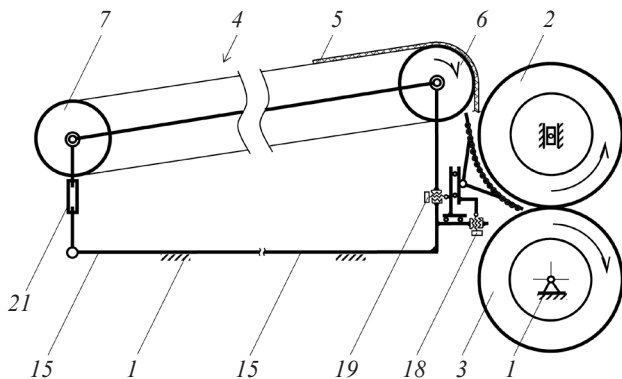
Scheme of a conveyor with a leather guiding device into the processing area between the rotating rollers: 1 – bed; 2 – upper roller; 3 – lower roller; 4 – string conveyor; 5 – sheet material (leather); 6, 7 – conveyor rollers; 15 – conveyor frame; 18 – inclination regulator of the guiding device; 19 – height regulator of the guiding device; 21 – string conveyor regulator
